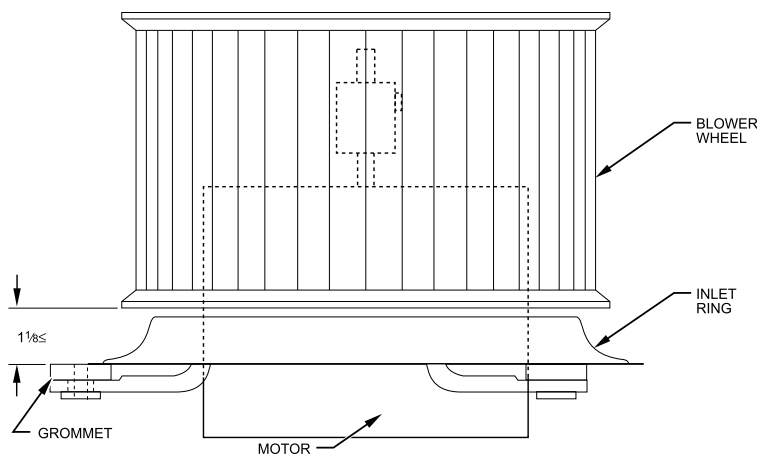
Motor, Inlet Ring, and Blower Wheel Assembly
